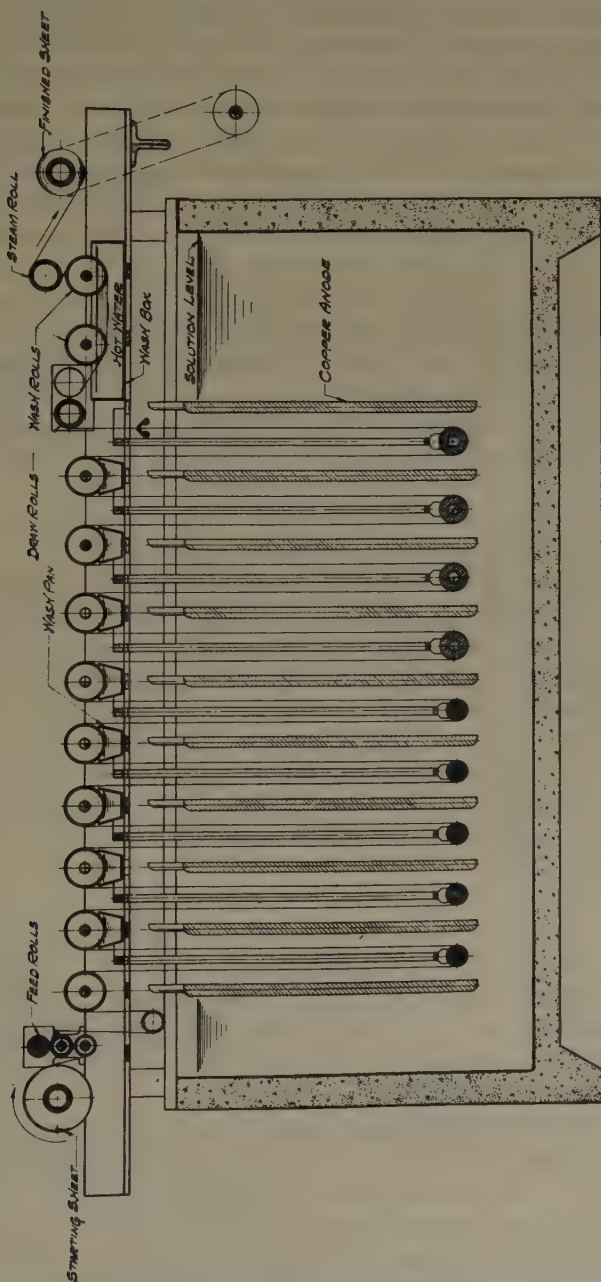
SECTIONAL ELEVATION OF FIRST-STAGE MACHINE.
